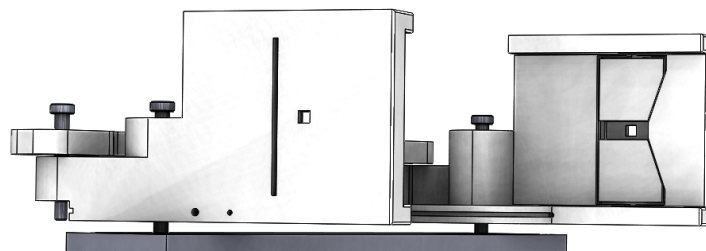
Side view of the prototype - the clamp blocks can be pulled together by a bolt and nut. When moving to the middle the plate spring will be clamped.
